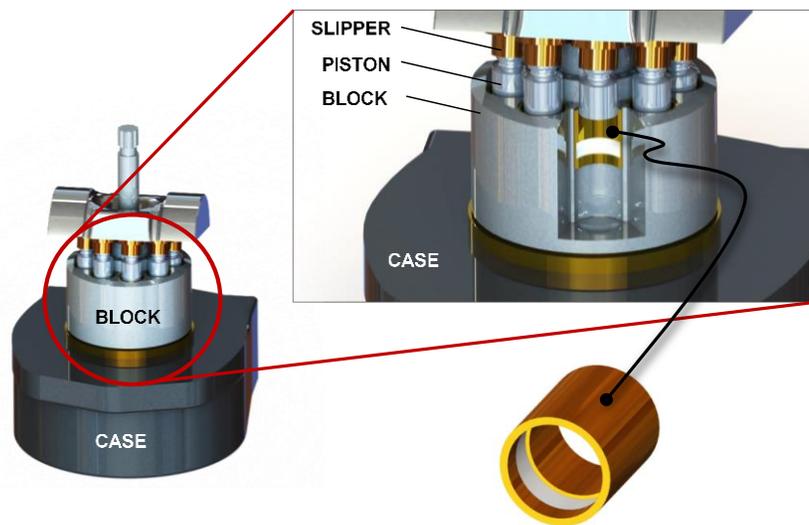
Bushing groove shown in a cutaway section of the rotating kit
